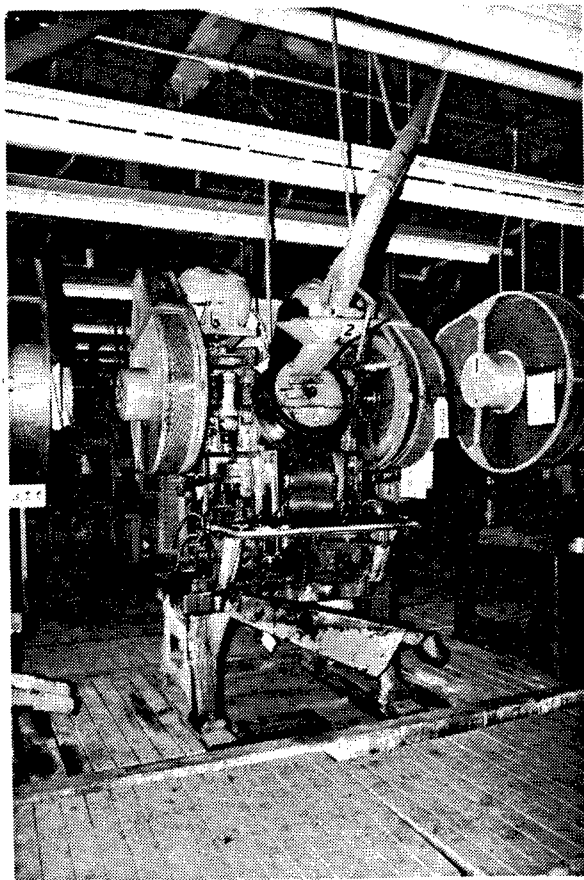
Building 102: Bullet Draw Machine manufactured in 1941 by E.W. Bliss Company.
